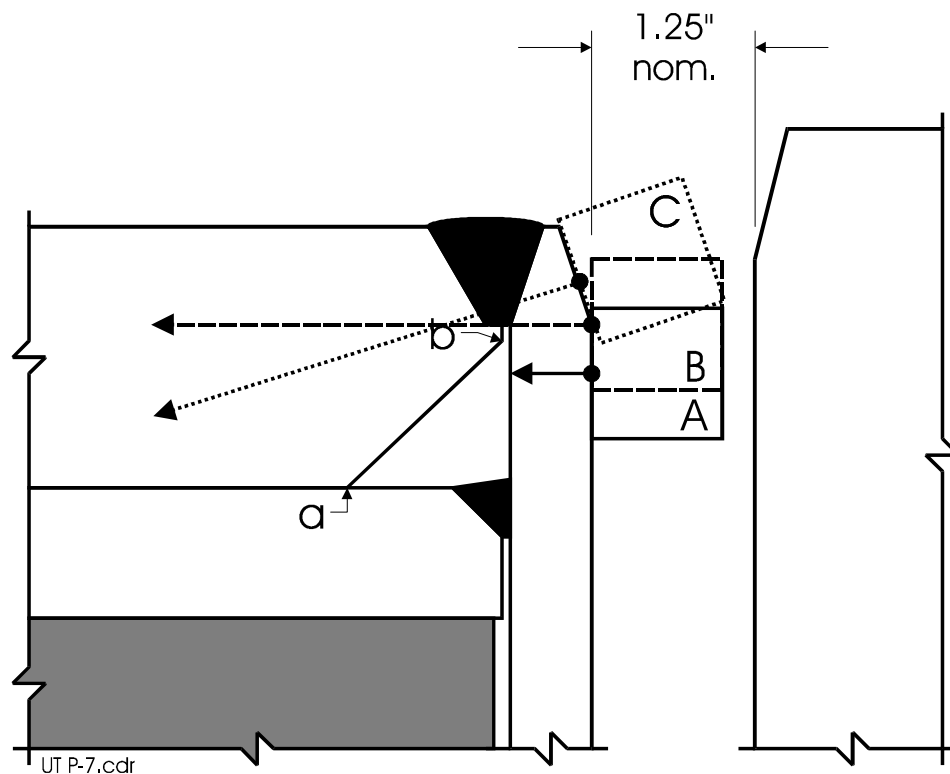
Outer Closure Plate Lower Chamfer and J-Bevel Weld Prep Nose Challenges to Straight Beam UT Examination
